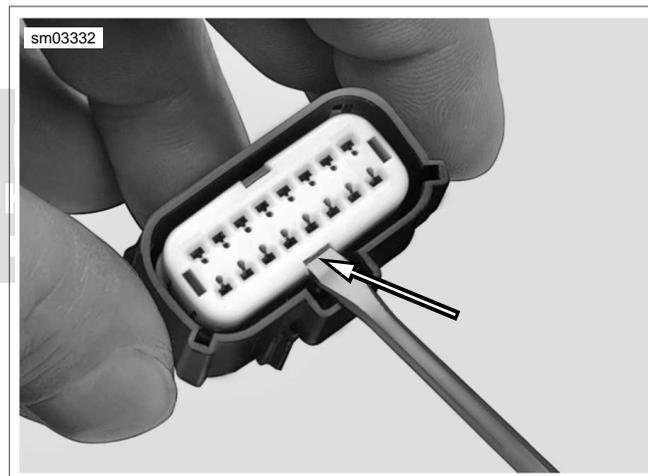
Secondary Lock Pry Slot (Socket Housing)
